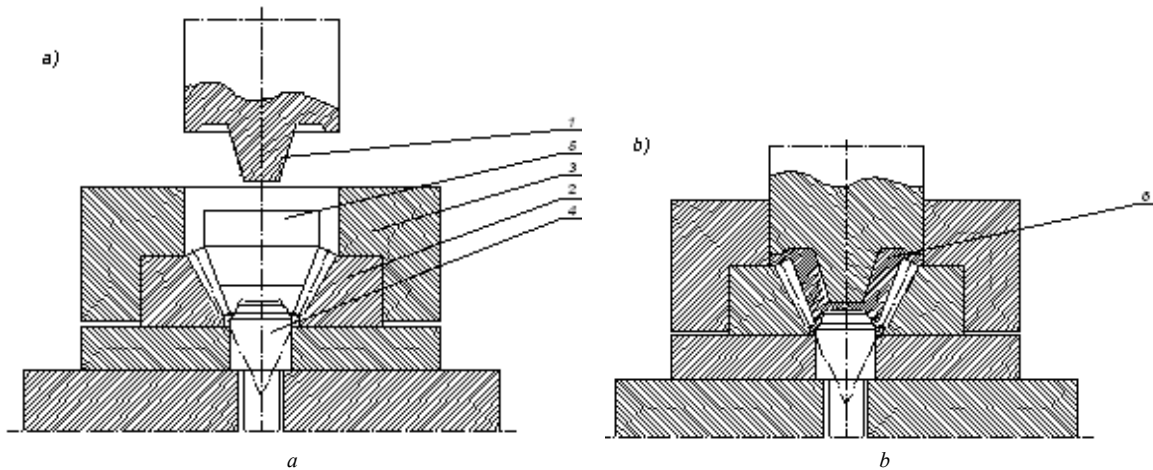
Schema of the forging process of conical toothed wheel according to the method worked out in INOP: a) the beginning of the process, b) the end of the process; 1-a punch, 2- die insert 3-mounting, 4-pusher's mandrel 5-billet formed mechanically 6-finished forging of the wheel [2]
